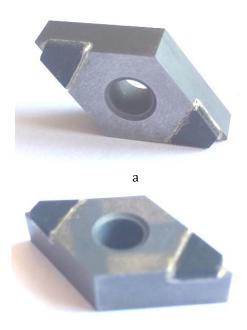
Plates made of super-hard composite materials: a – plate soldered to the body of machining tool, b - segment plate for mechanical hardening
